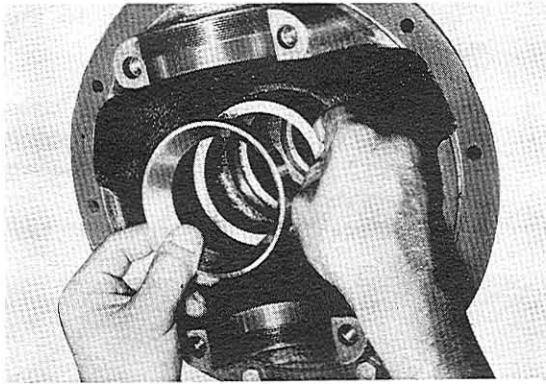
Assembling Shim V5101 & Bearing Cup
